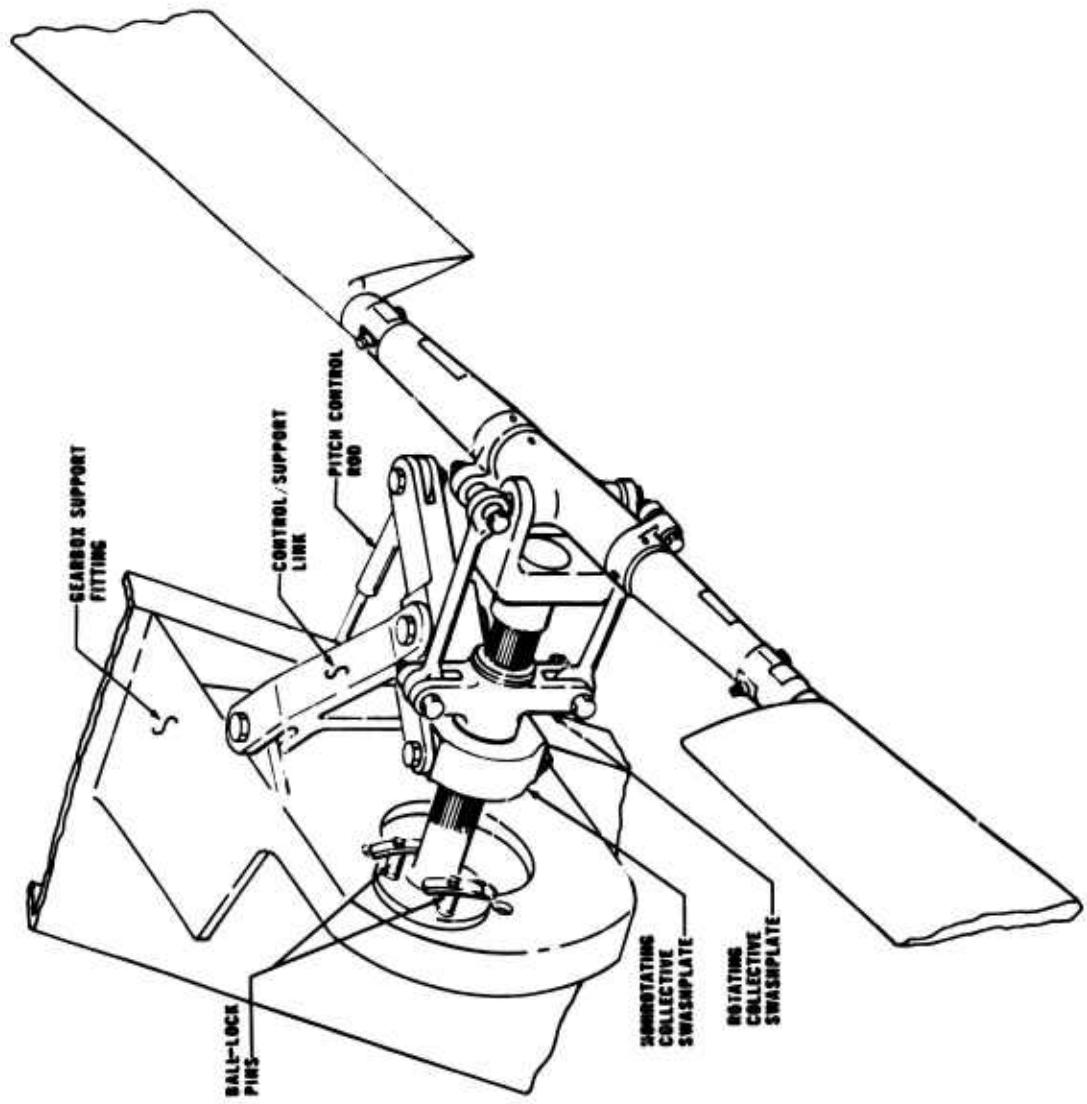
Stowed Tail Rotor With Tail Rotor Gearbox Removed.
